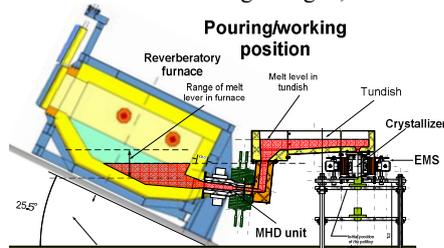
Device and technological scheme for pilot plant reverberator-melting furnace with MHD unit and tundish for continuous billet casting.
